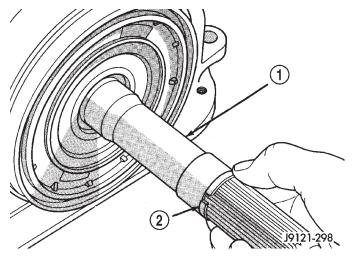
Intermediate Shaft Spacer Location 1 - INTERMEDIATE SHAFT 2 - INTERMEDIATE SHAFT SPACER (SELECT FIT)
